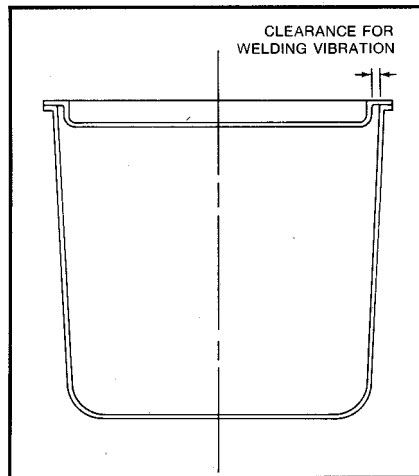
Automotive carbon canister design for vibration welding assembly using Du Pont Hytrel polyester thermoplastic elastomer.
